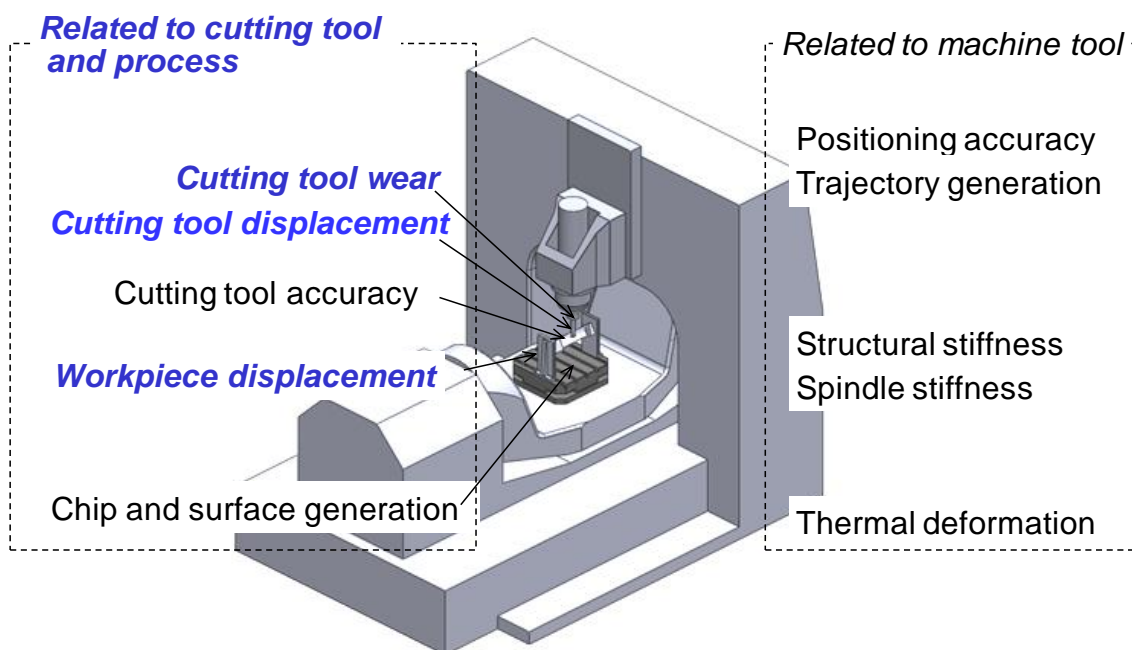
15 Example of the structure of a multi axis machining center and issues for high accuracy machining.
